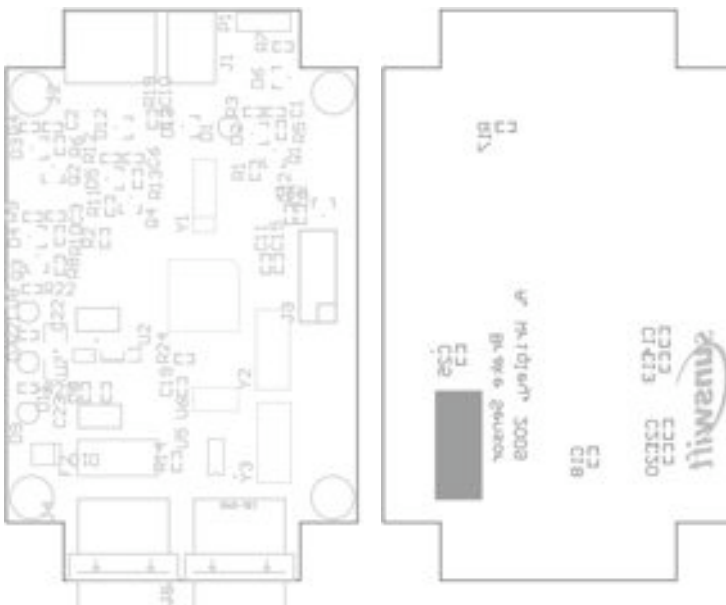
Brake Sensor PCB: Top and bottom layer component placement.
